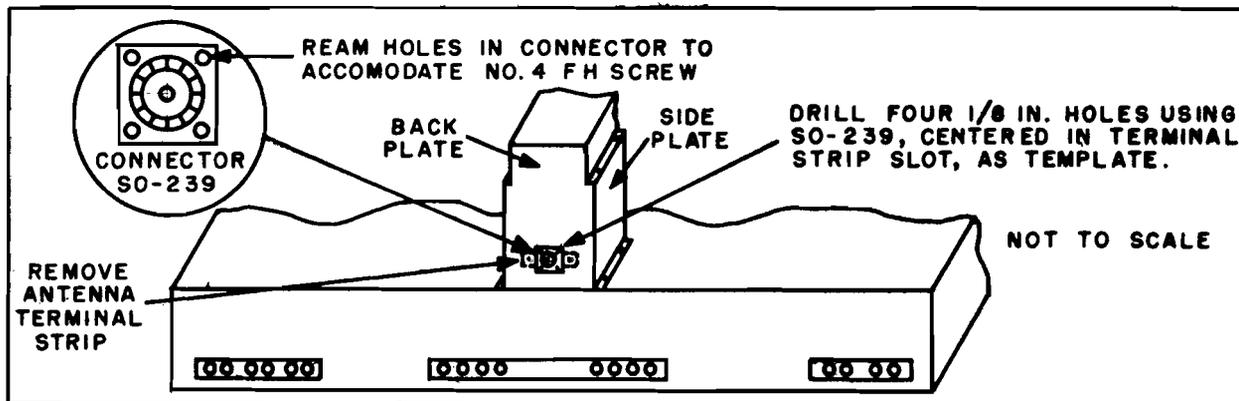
Radio Receiver BC-779, Partial Rear View Showing Mounting Details for Connector SO-239
